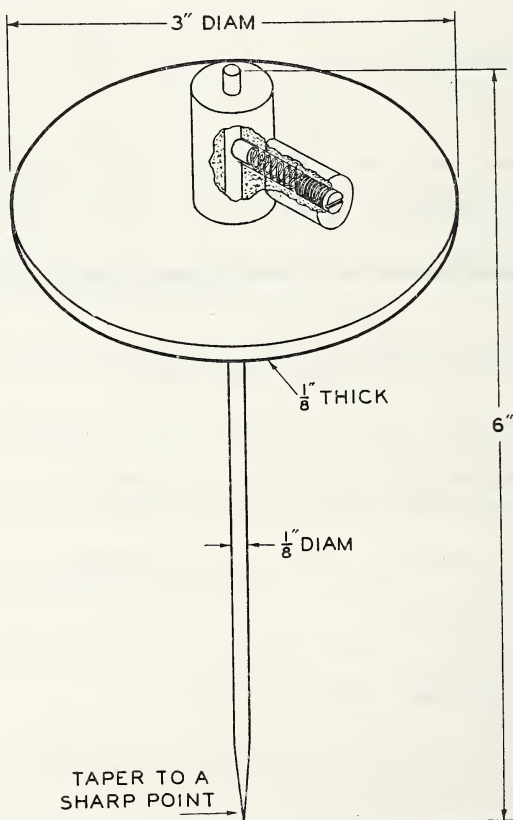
Depth gage for thickness measurements of industrial batt, blanket, felt and blanket-type pipe insulation. For Industrial Cement Test the Flat Disk shall be  $\frac{1}{2}$  inch in diameter instead of 3 inches.
